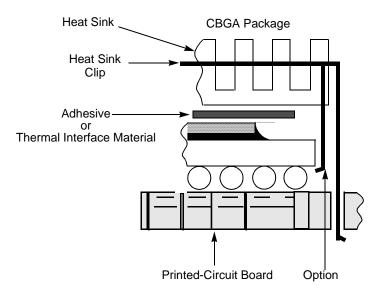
Package Exploded Cross-Sectional View with Several Heat Sink Options
